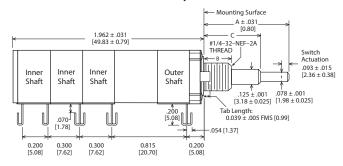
SHA13: Concentric Shafts, Solder Hook, 3 Potentiometer(s) or RS + MP, 1/4" Bushing
